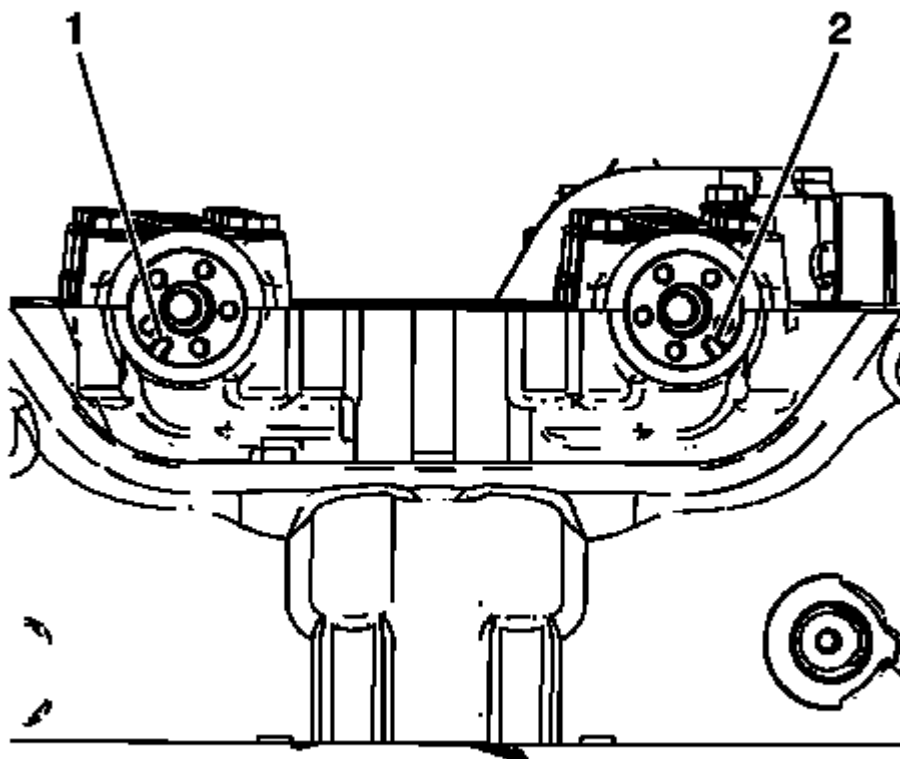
Mark Cylinder Head Where Exhaust Camshaft Actuator Locking Notch (1) And Intake Camshaft Locking Notch (2) Are Lined Up With Cylinder Head
